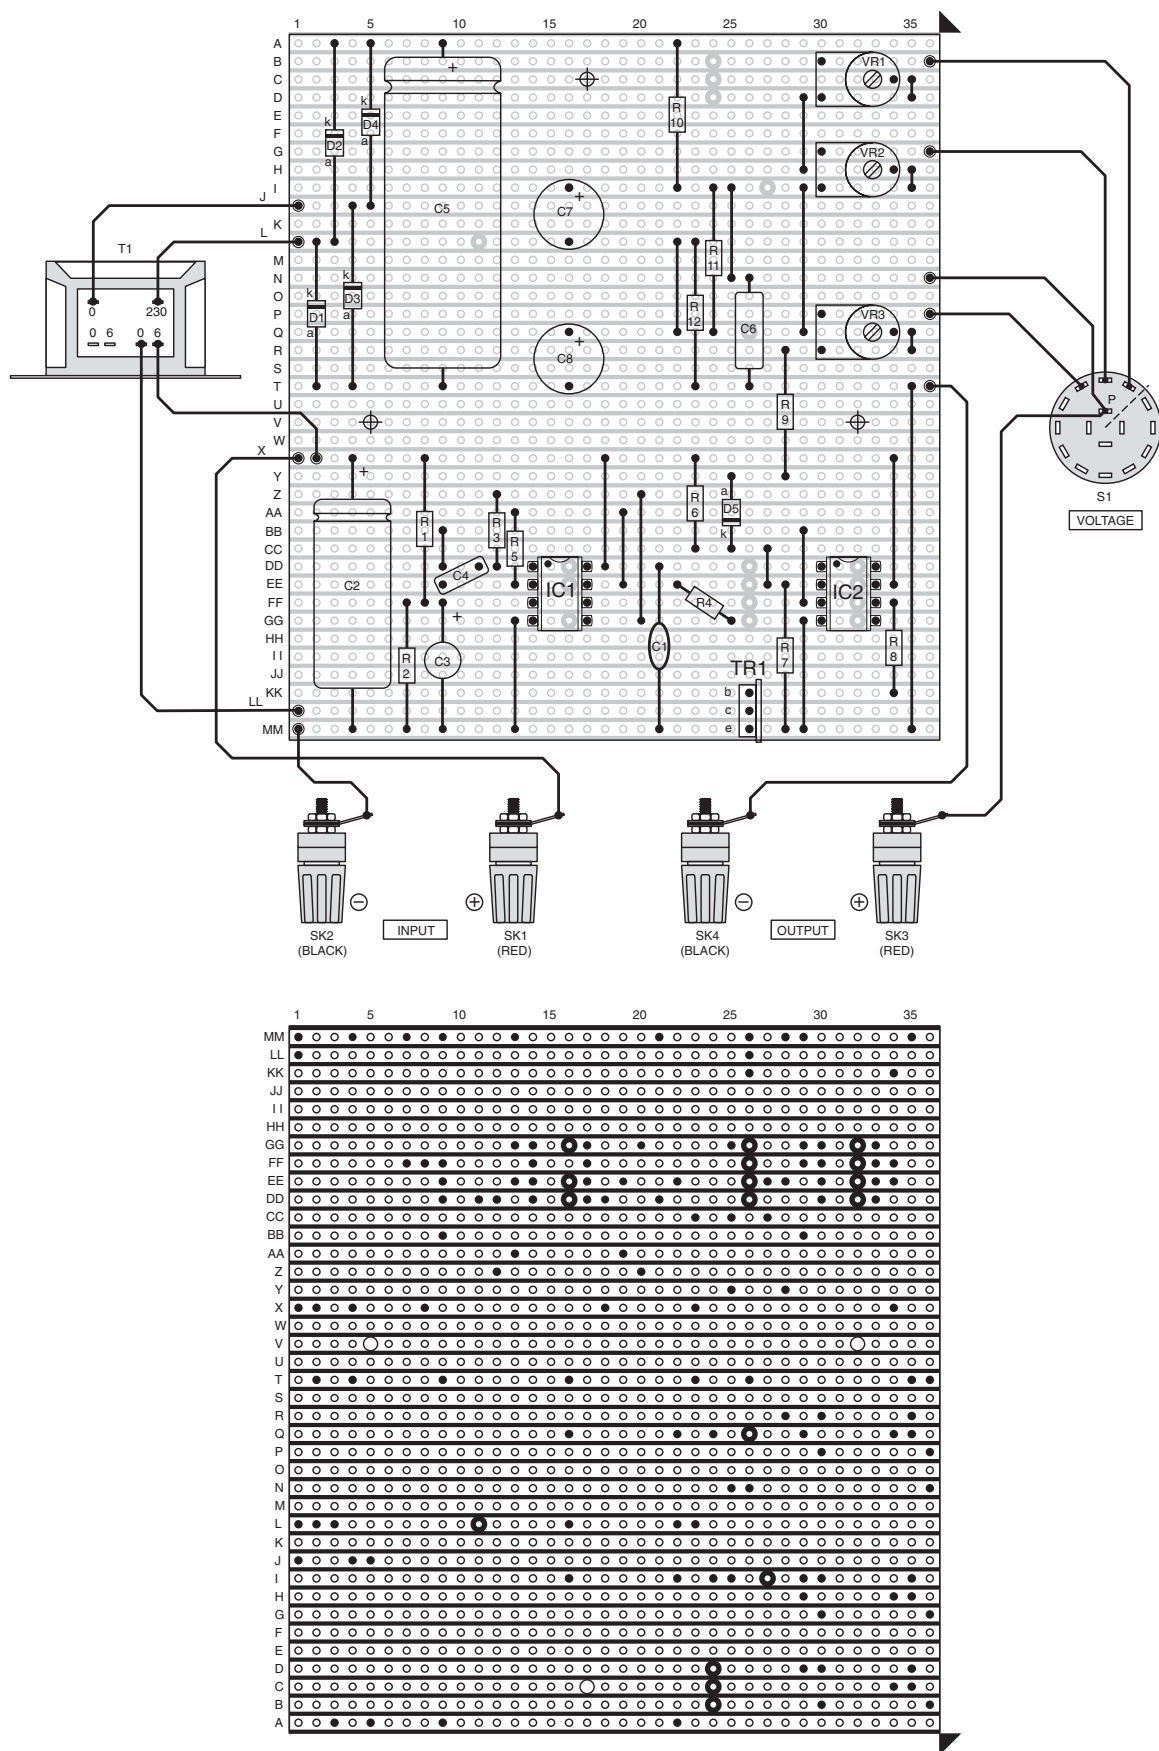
Stripboard topside component layout, interwiring and details of underside copper track breaks.
